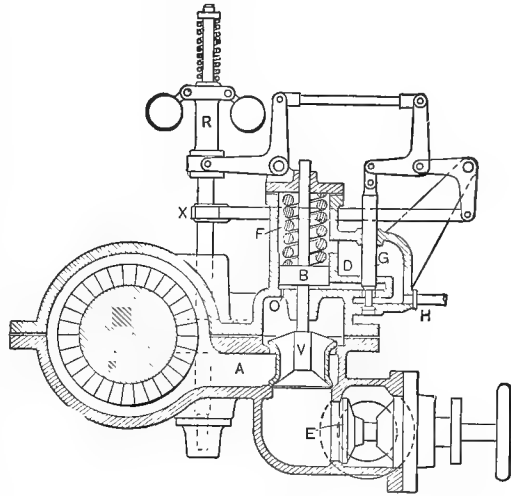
Vibrating valve-gear of the Parsons steam-turbine.
